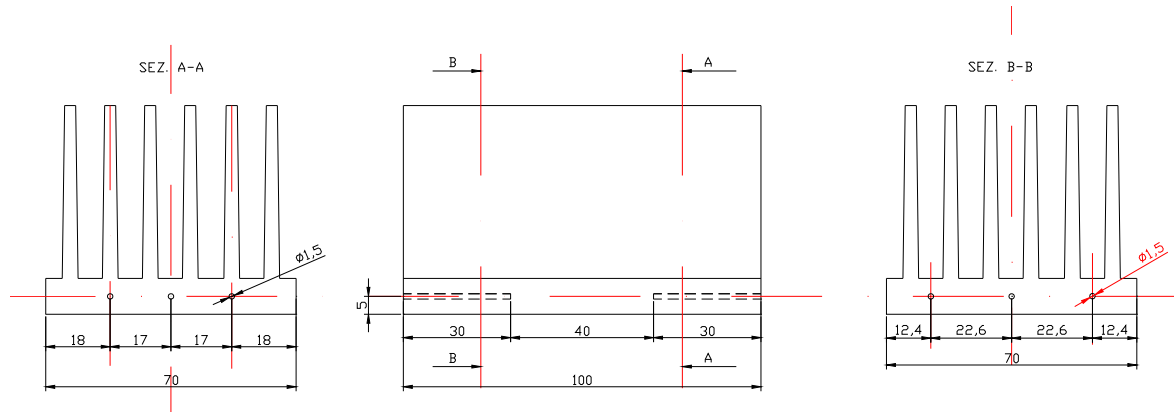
Drawings of the location of the six holes drilled in the specimen.
